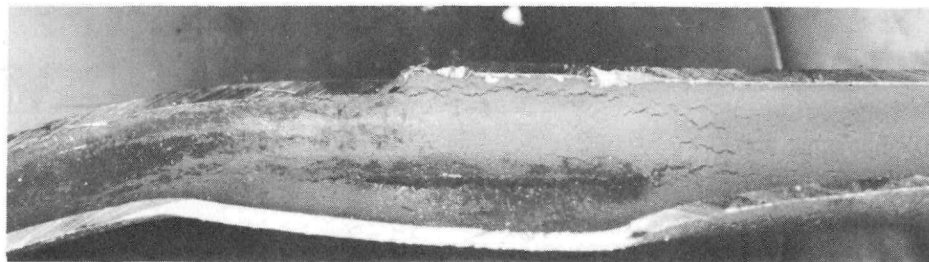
Type 347 Stainless Steel--Transverse Section Through Longitudinal
